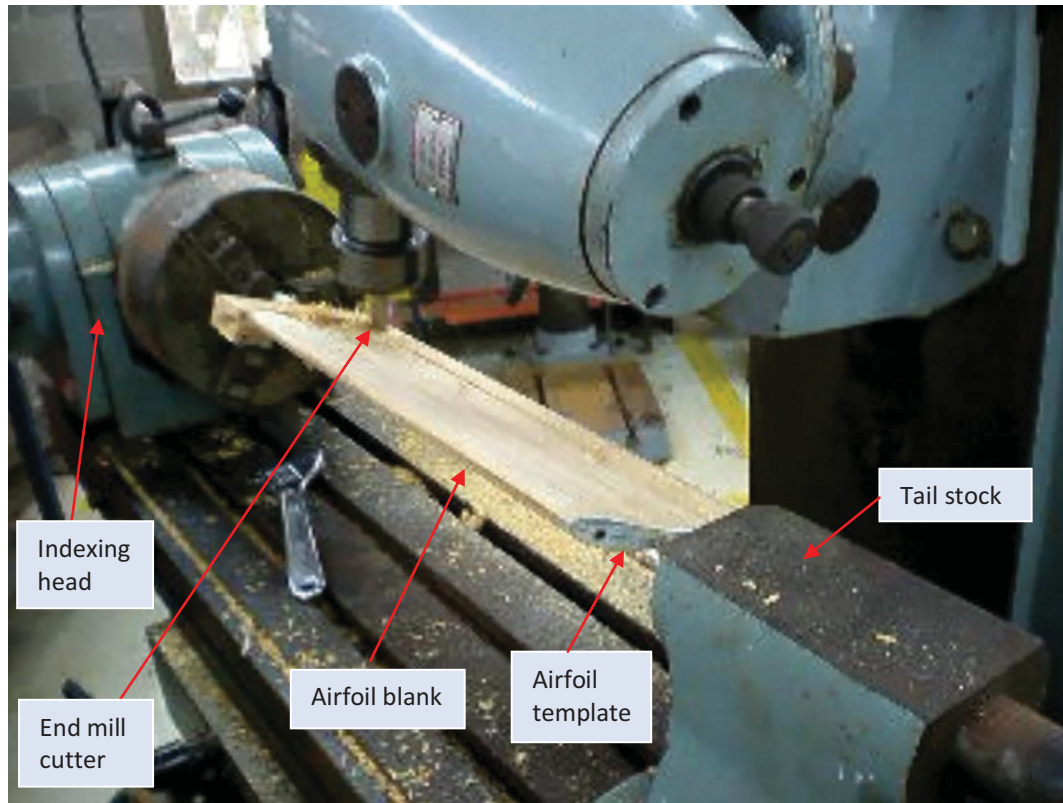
Fabrication of the 3 airfoils that were shaped out of wood on the milling machine
